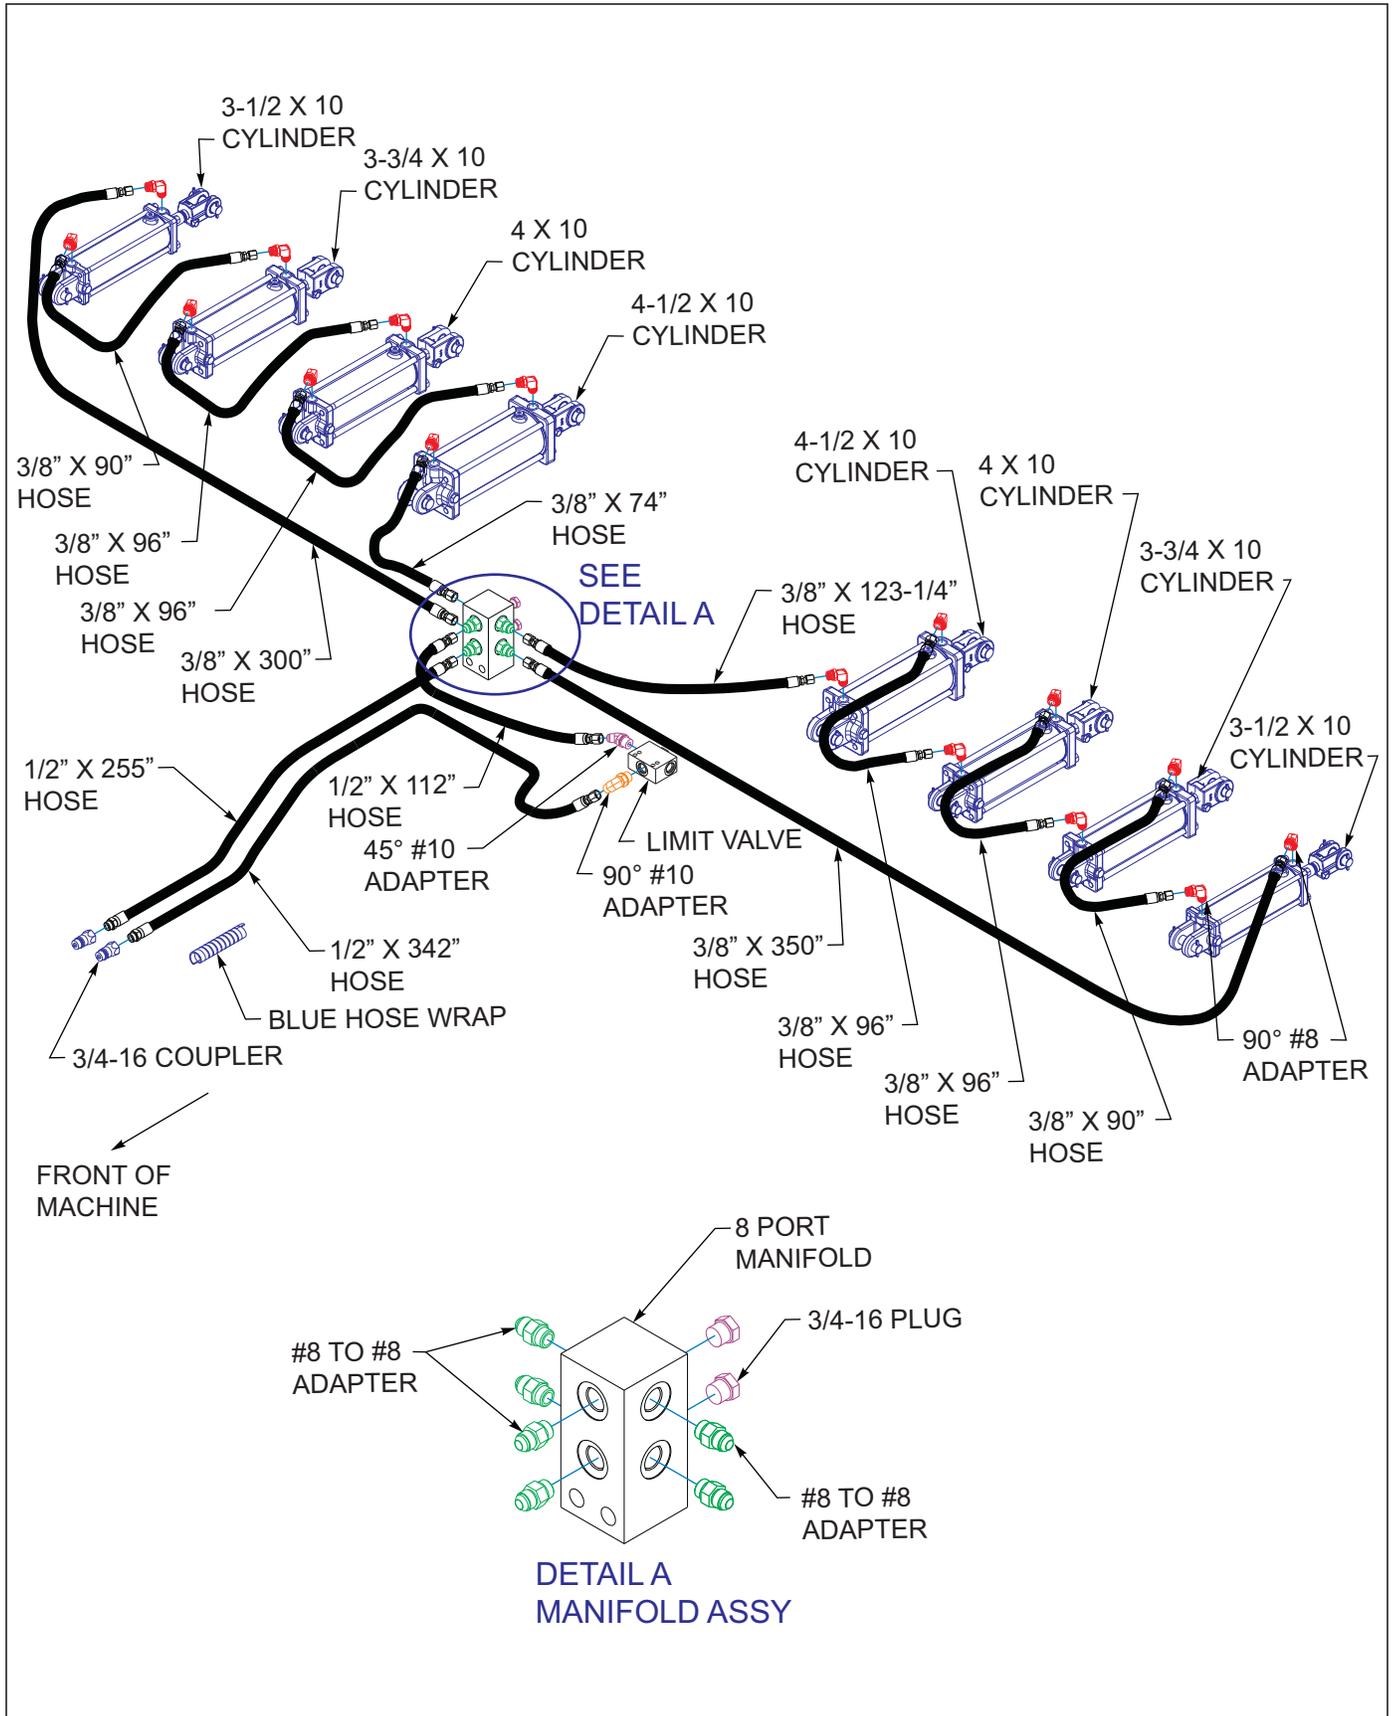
Lift Hydraulic Placement LH 1770-40'
